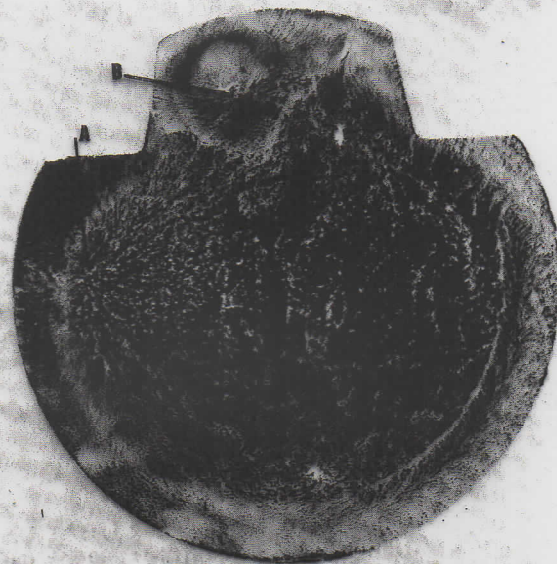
Some rotating bending-fatigue failures begin beneath surfaces. In this induction-hardened axle shaft, fracture started at A and moved into the cross section, meeting another subsurface crack that started at B, resulting in final fracture. (Courtesy of D. J. Wulpi, International Harvester Company.)
